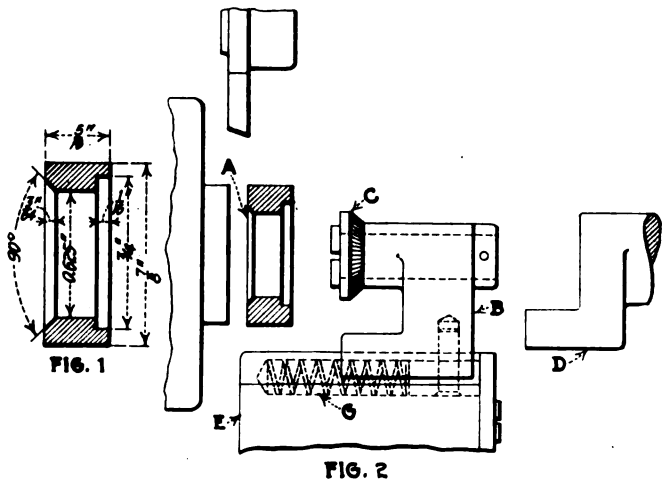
THE BUSHING TO BE KNURLED. FIG. 2—ARRANGEMENT OF KNURLING TOOL AND HOLDER
